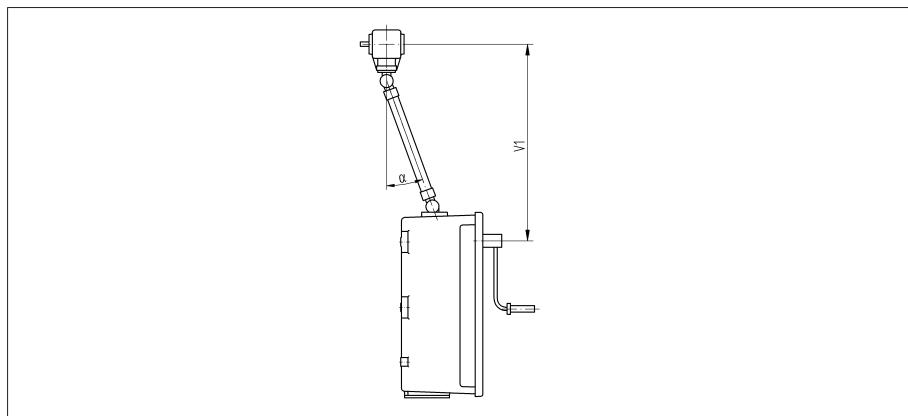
Drive shaft with cardan shaft, without insulator (= special model)
